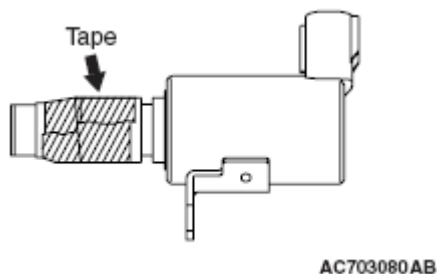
Winding Sealing Tape Around Oil Passages Cut-Out Area Of Engine Oil Control Valve
